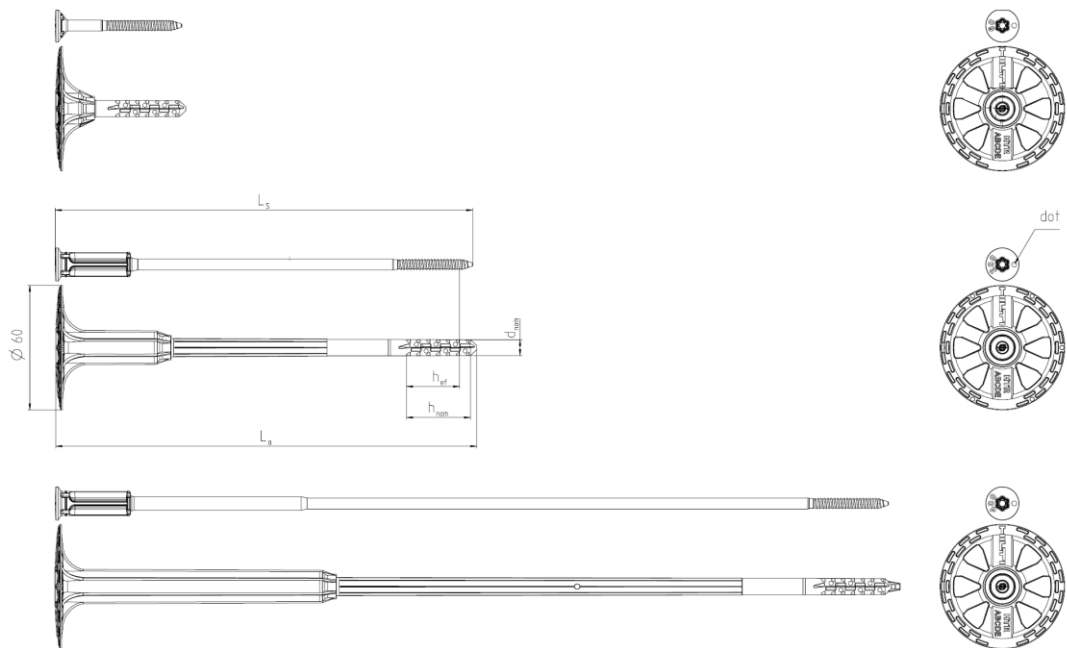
HTR-M - assembled sleeve, plate and composite screw
